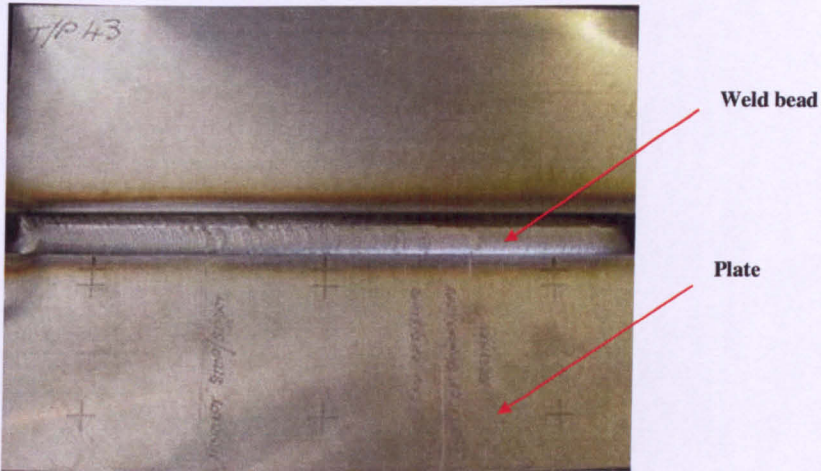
TIG groove weld plate (plan view)
